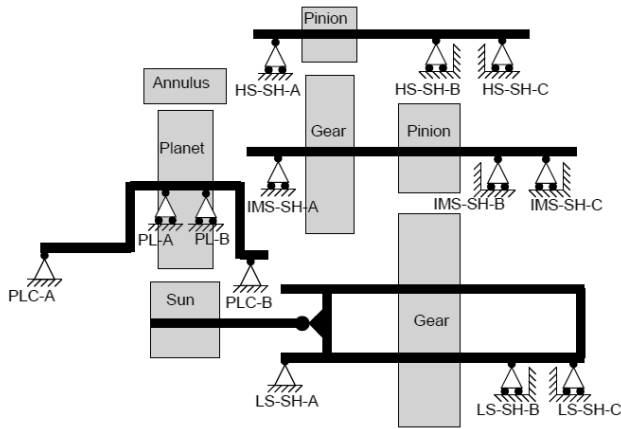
Locations and nomenclature of the bearings in the test gearbox.
